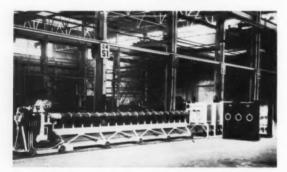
Superior Tube Company 24-foot Vacuum Furnace.
